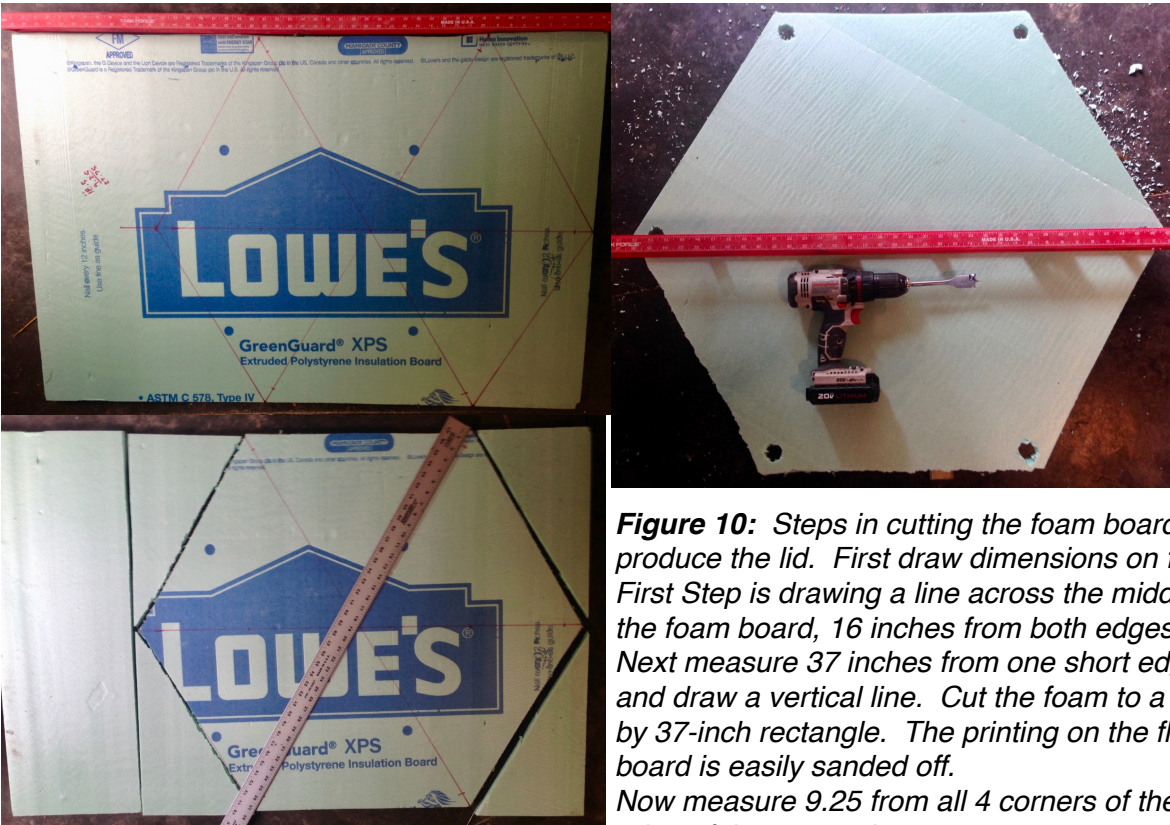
Steps in cutting the foam board to produce the lid. First draw dimensions on foam. First Step is drawing a line across the middle of the foam board, 16 inches from both edges. Next measure 37 inches from one short edge and draw a vertical line. Cut the foam to a 32 by 37-inch rectangle. The printing on the float board is easily sanded off. Now measure 9.25 from all 4 corners of the long edge of the rectangle.
